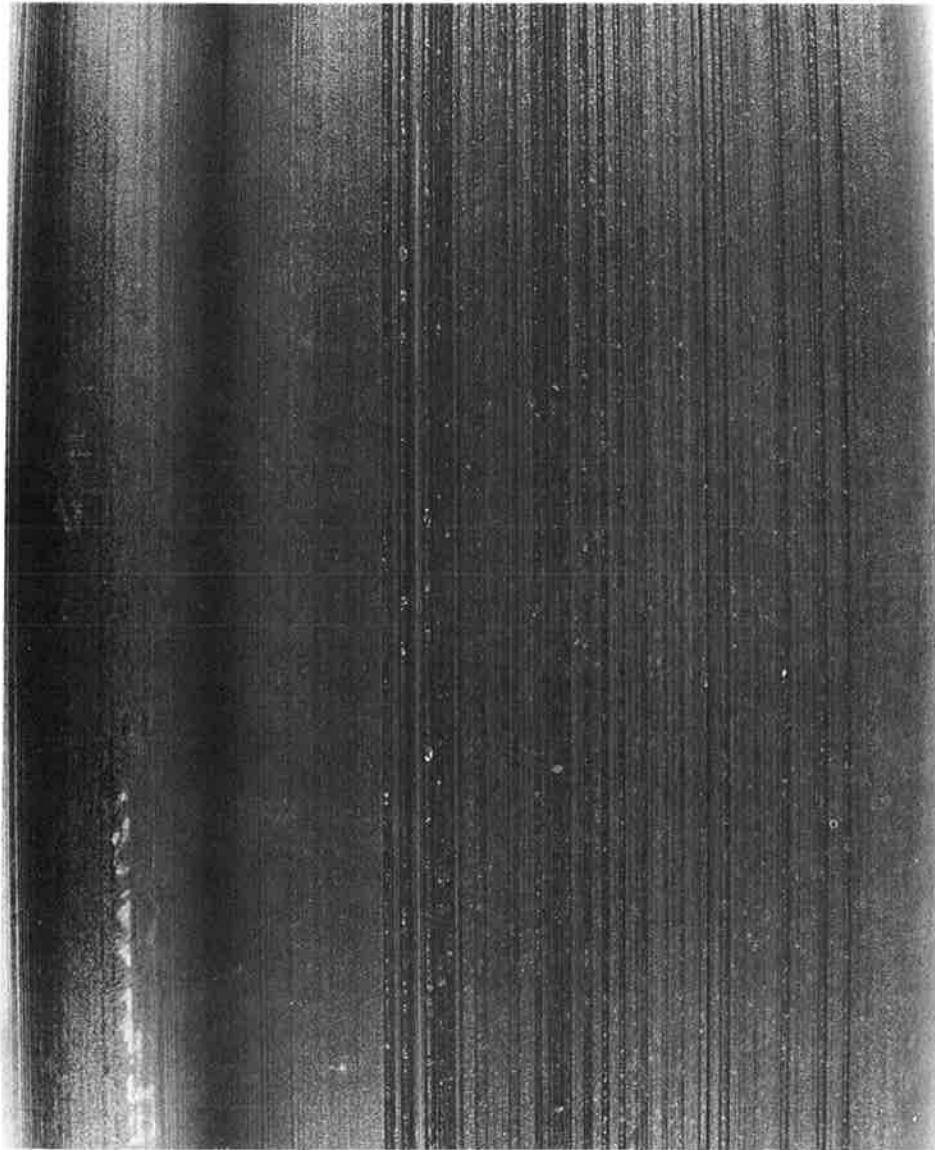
APPEARANCE OF TREAD AND FLANGE OF WHEEL NO. 2 AFTER SPEED-REDUCTION BRAKE TESTING. NOTE GROOVES CAUSED BY BRAKE-SHOE-WHEEL INTERACTION (ACTUAL SIZE - SEE FIG. 20 FOR ILLUSTRATION OF GROOVE DEPTH)
